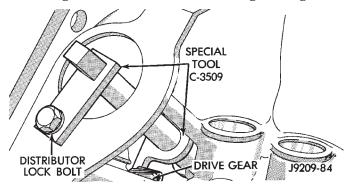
Camshaft Holding Tool C-3509 (Installed Position)
